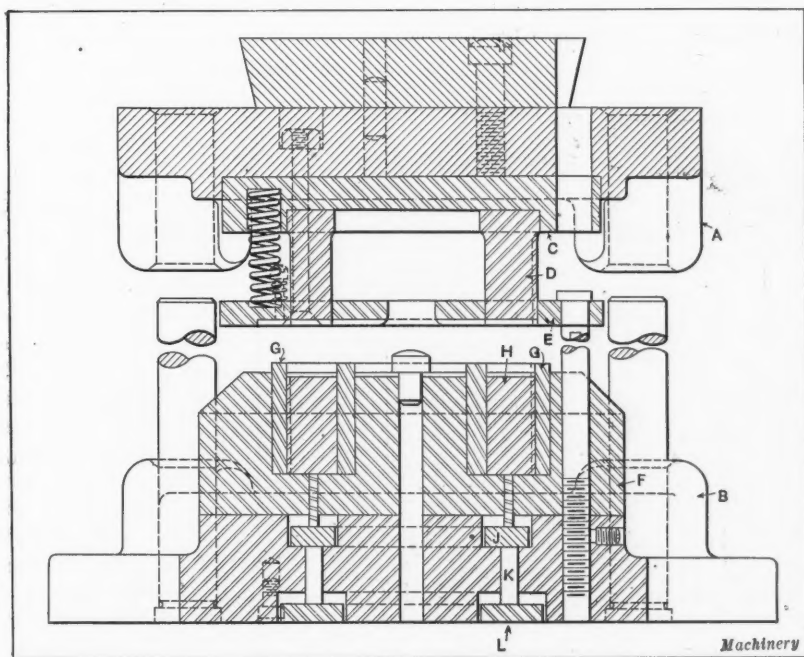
Single-stroke Multiple Slotting Sub-press Die for Rotor Stampings
